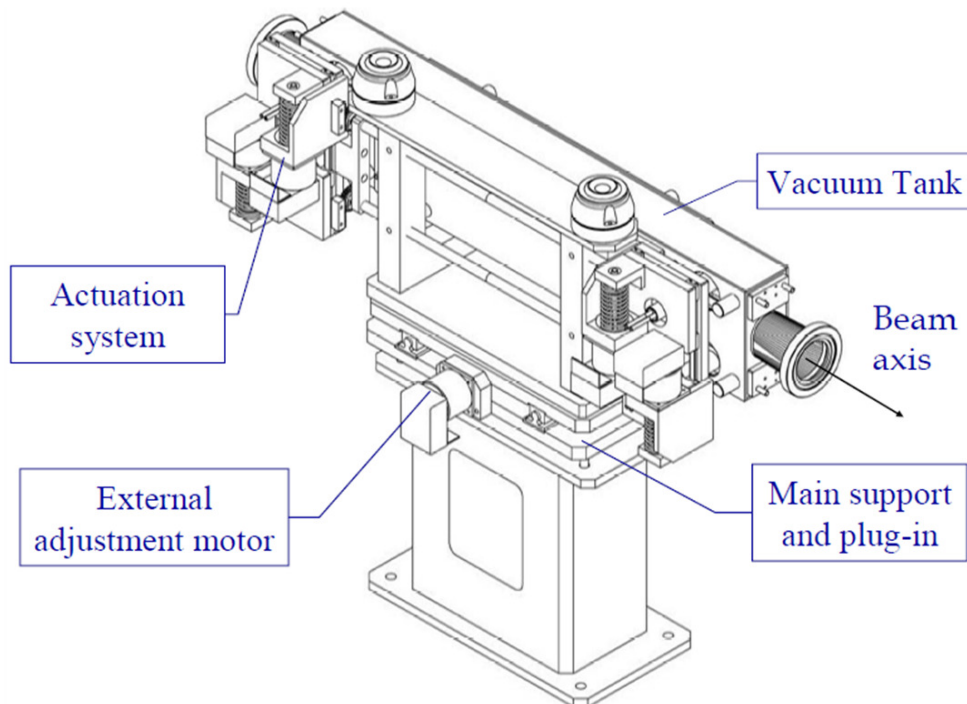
3D CAD assembly of a full LHC collimator (vertical configuration) on its support (adapted from [27]).
